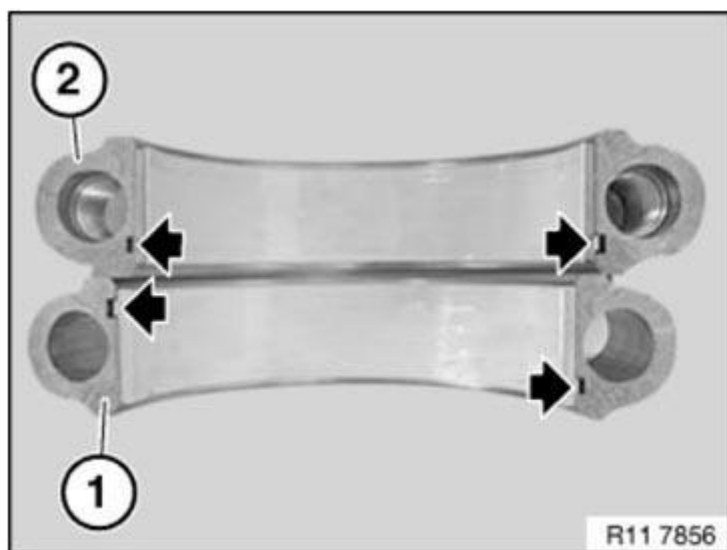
Locating Red Bearing Shell Fastening Notches And Blue Bearing Shell Fastening Notches
